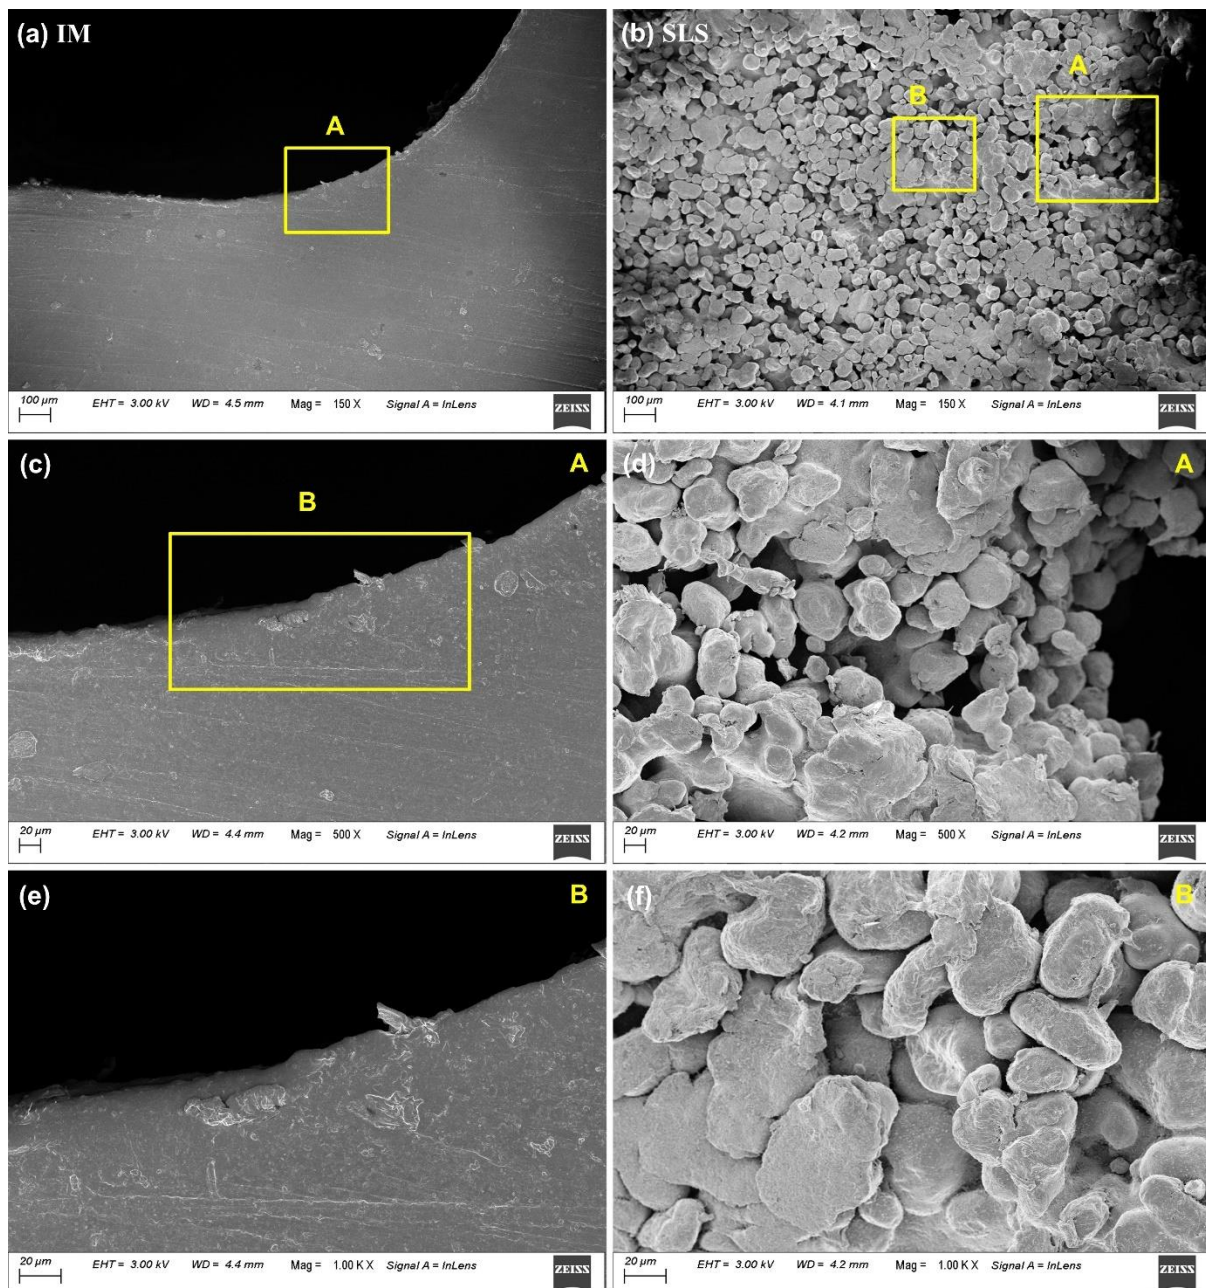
Surfaces of injection-molded gear tooth (a, c, e) and selective laser sintered gear tooth (b, d, f) in the fillet region. Broad and close-up views of the surfaces are presented.
